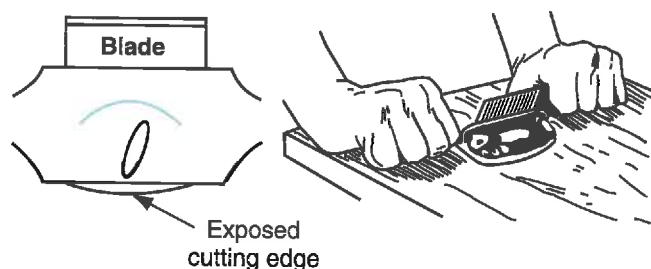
Change depth of cut with the adjusting screw. (*Stanley Tools*)
